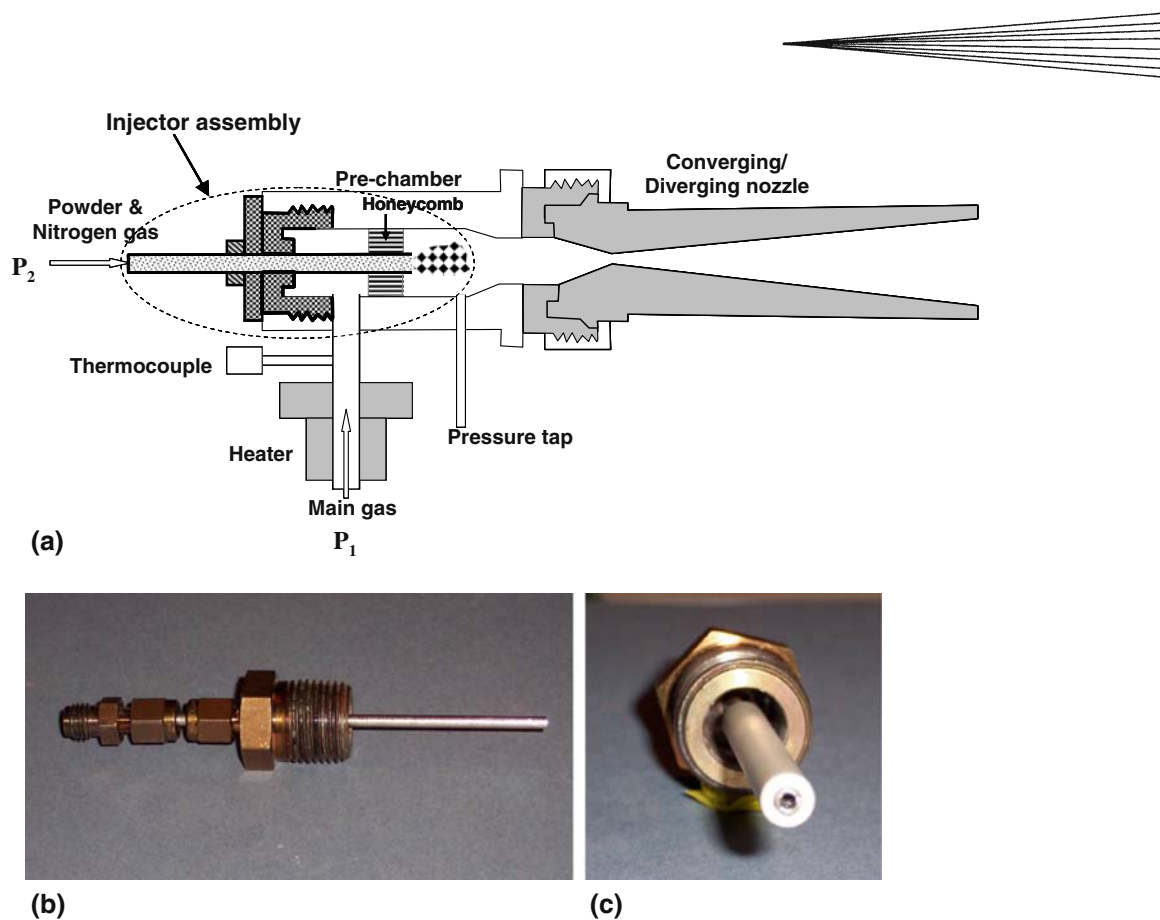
Schematics of overall high-pressure cold spray: (a) Spray nozzle assembly, (b) A baseline powder injector assembly, and (c) Injector with Macor insulator
